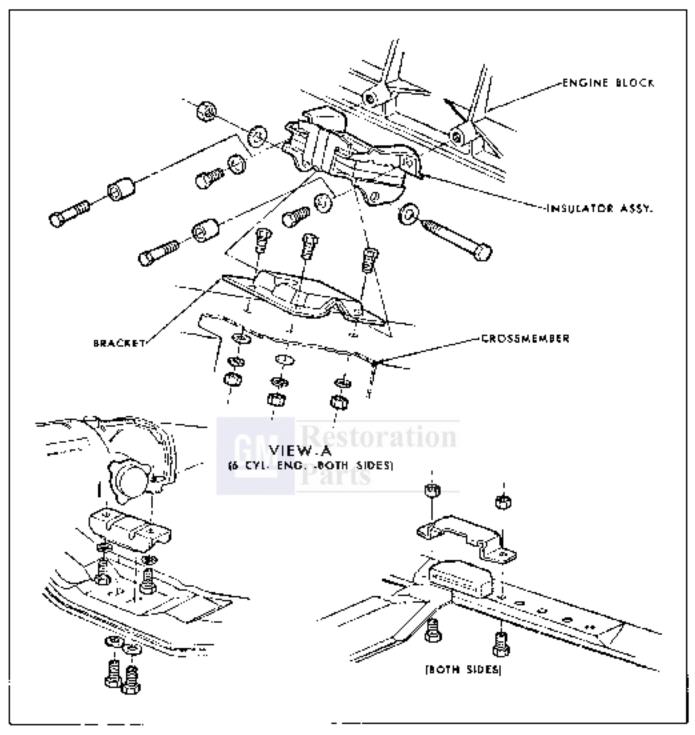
6 Cpl. Engine Mounting-Temport
